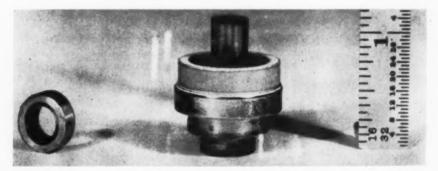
Example of operation in which electrical discharge machining was most advantageous.
